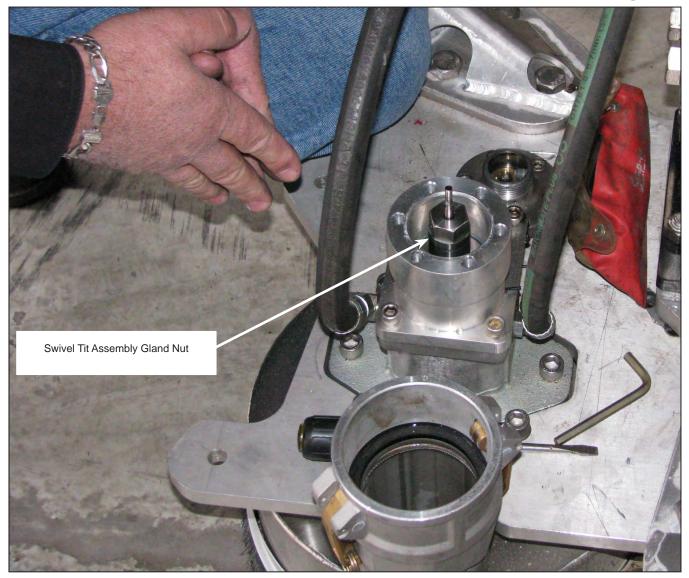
Swivel Tit assembly/gland nut to be removed by turning counterclockwise with a 15/16" deep well socket or box end wrench.
